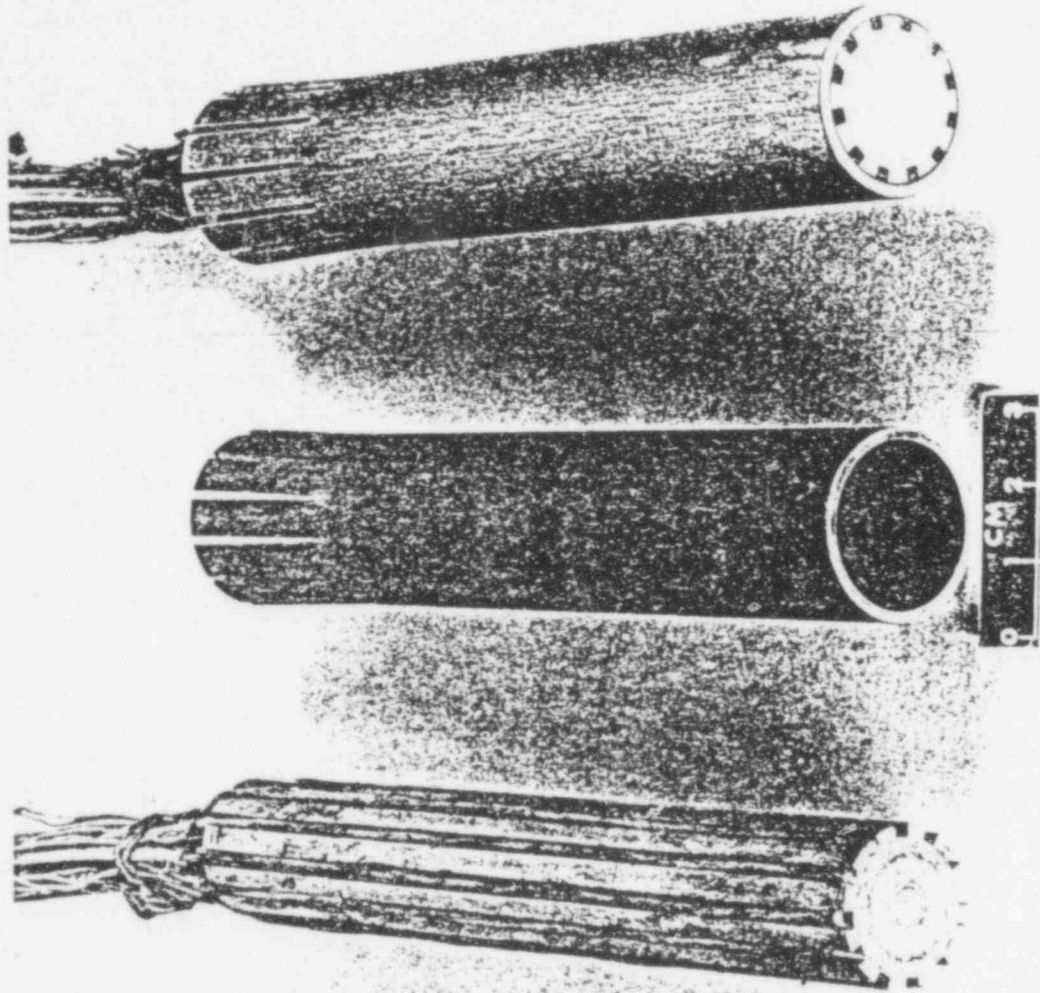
TSE-5 thermocouple thimble components and assembly.
